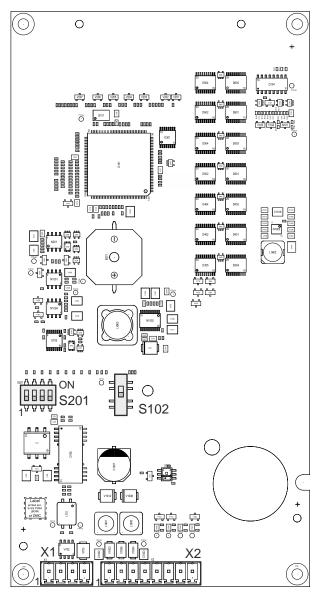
Extinguishing terminal XTO2001-A1, printed circuit board rear view
